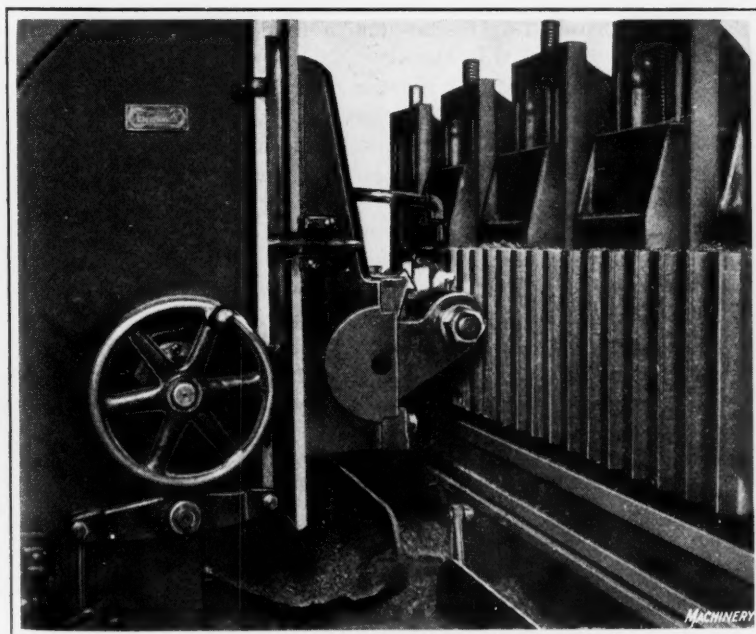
Rack-cutting Machine of the Vertical-cutting Type
